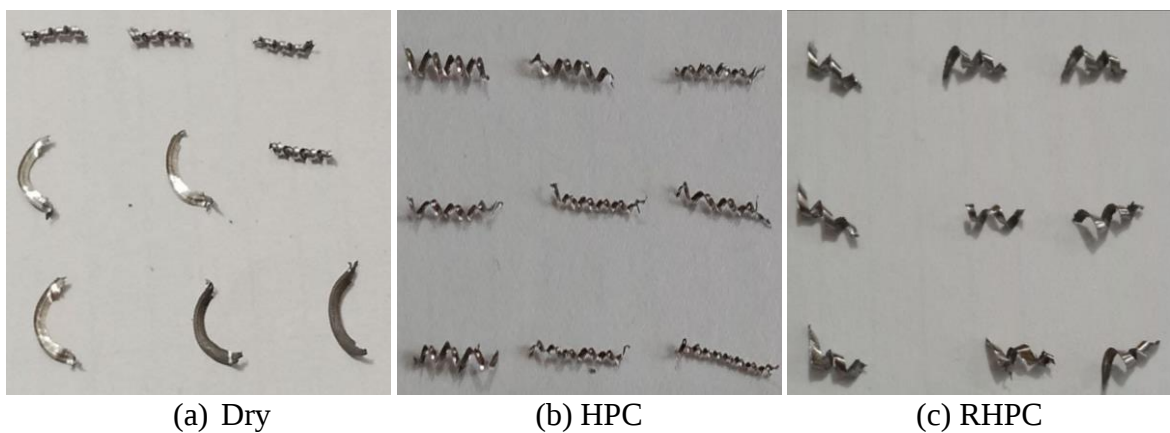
Photographic views of chips under (a) Dry, (b) HPC, and (c) RHPC conditions in milling at $V_c=24$ m/min, $f=44$ mm/min and $a_p=0.75$ mm
